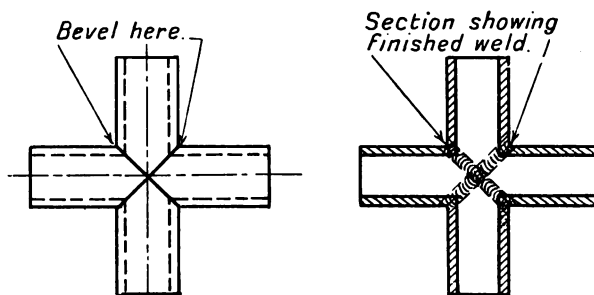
Welded cross in pipe, left, bevel right, welded.
